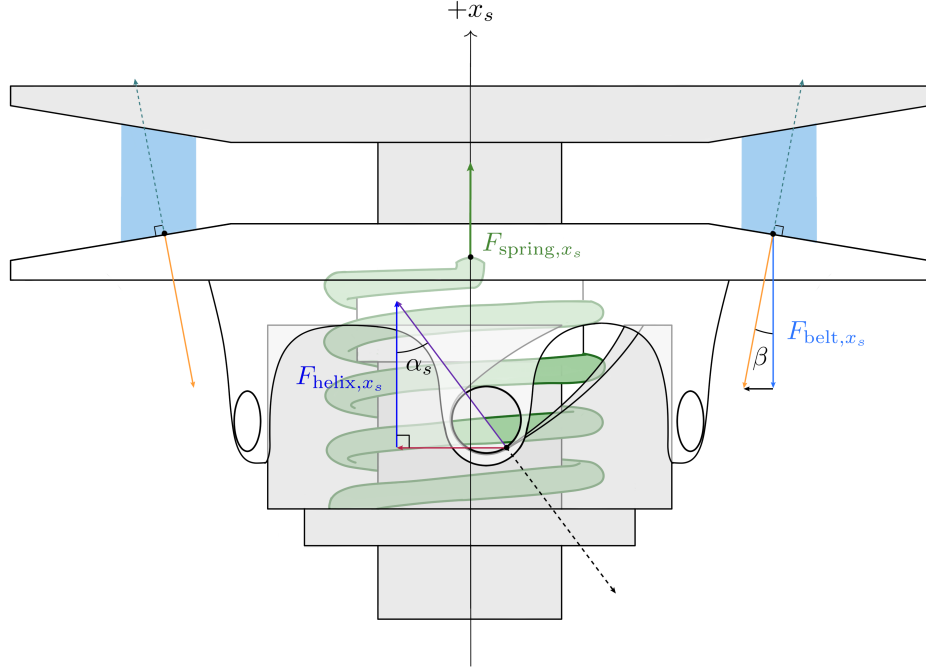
Axial free body of the complete movable secondary assembly. The axial spring force and belt reaction act directly on the translating assembly, while the secondary’s torque-reactive behaviour enters through the pin–helix force F_{helix, x_s} .
